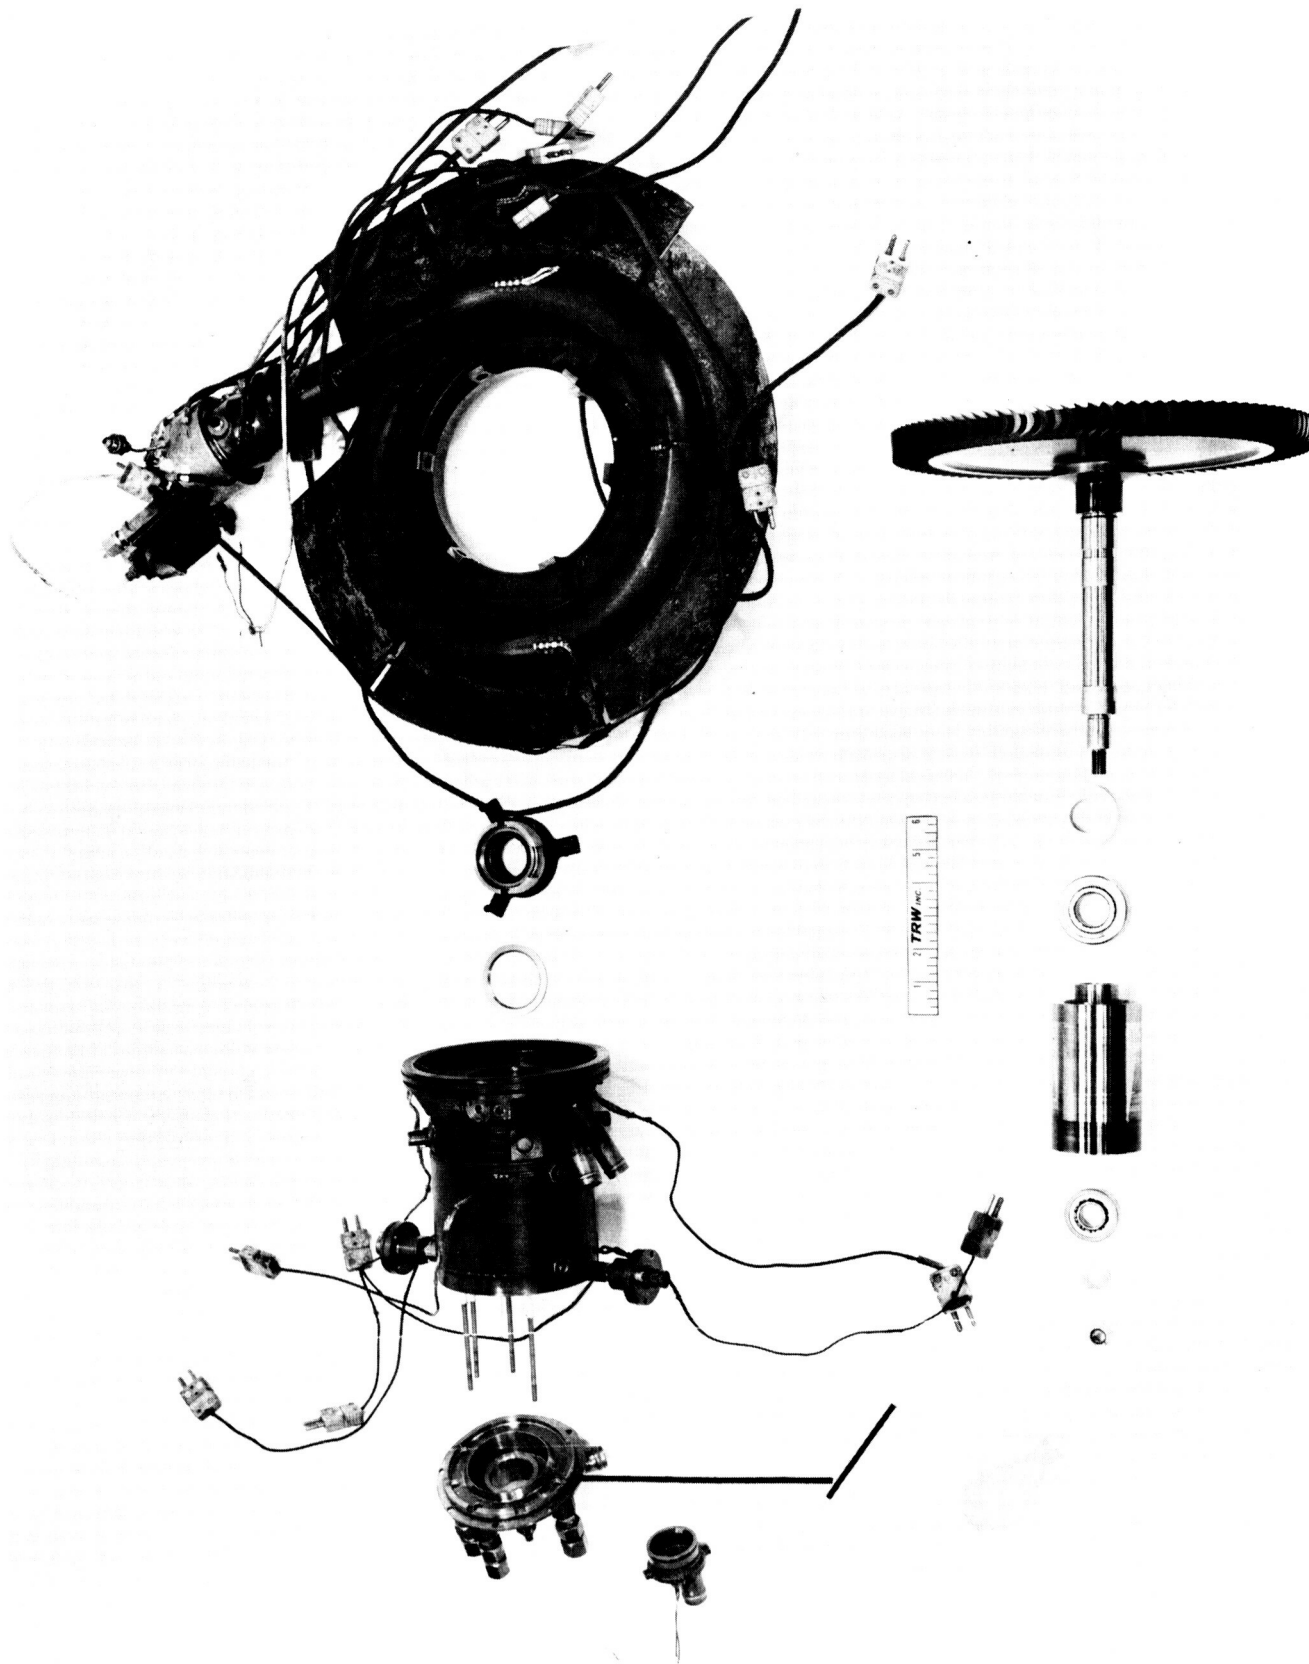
DISASSEMBLED TURBO-ALTERNATOR
